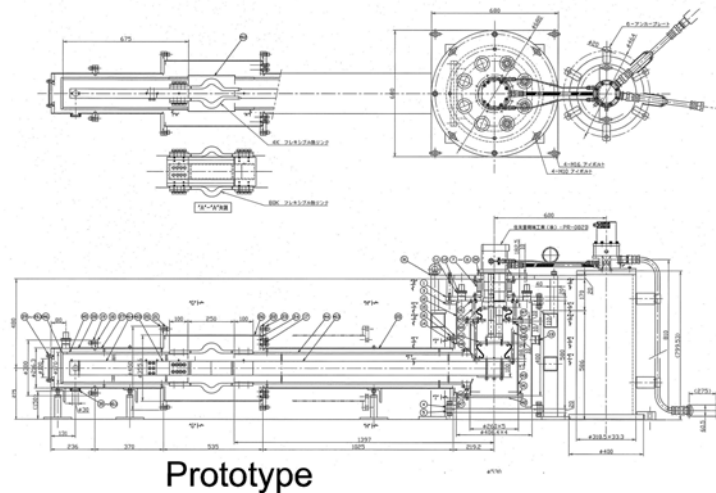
A prototype of low vibration 4K cryocooler unit. Drawing: JECC TORISHA
